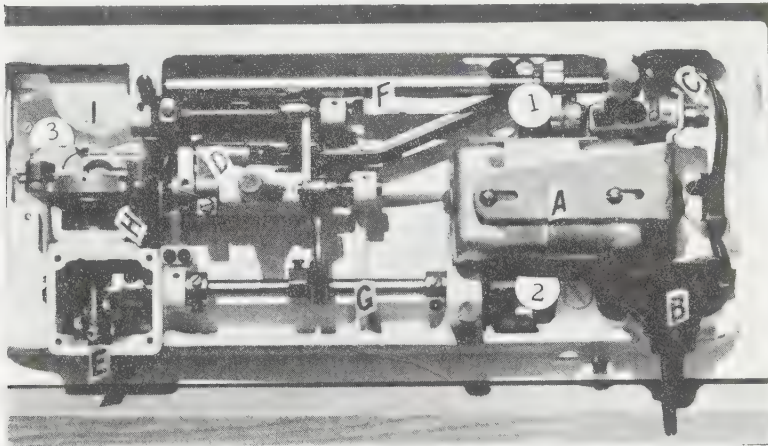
illustrates components of the lower sewing mechanism, with motor(A) concealed. Motor can be serviced from preface text.
